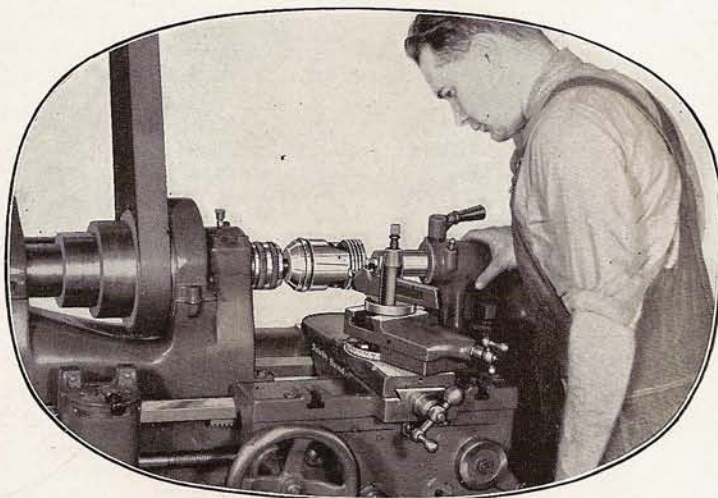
Finishing a Semi-Machined Piston in the 16-inch Lathe.
